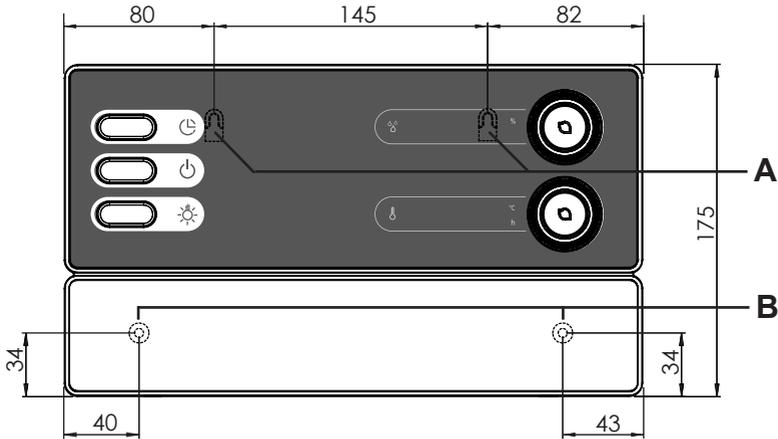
Position of the attachment device and the installation holes (dimensions in mm)
